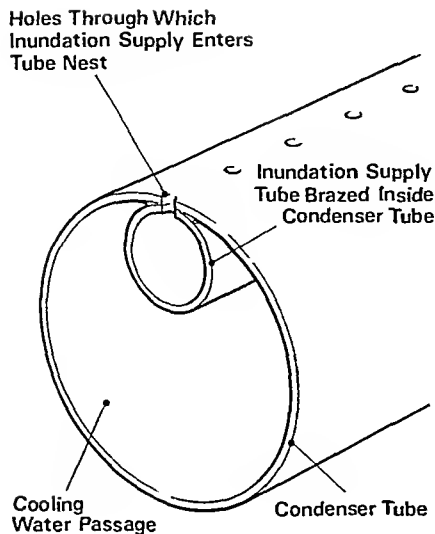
CROSS SECTION THROUGH SPECIALLY CONSTRUCTED INUNDATION SUPPLY TUBE
